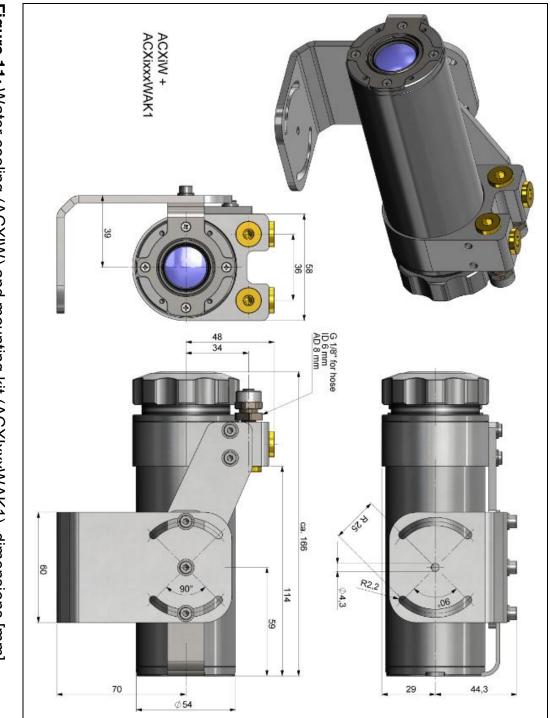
Water cooling (ACXIW) and mounting kit (ACXIxxxWAK1), dimensions [mm]
